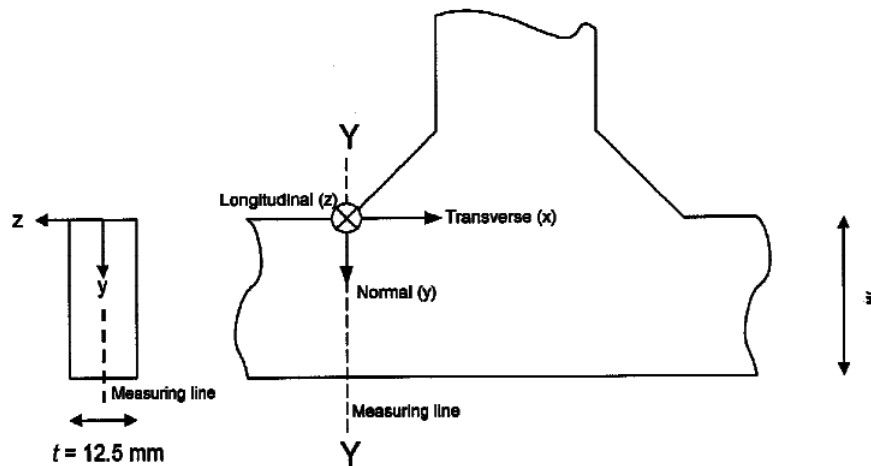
T-plate weld with measurement directions indicated. [19]
